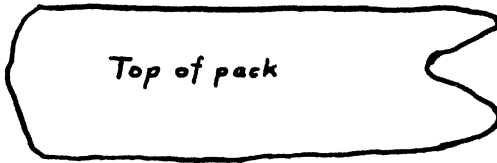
Very long "ears" on back end of pack, caused by mill being too hollow.
